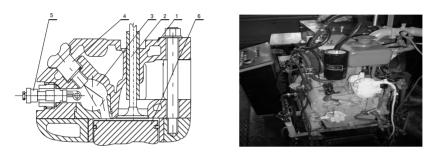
Cross-section and view of a two-cylinder self-ignition engine: 1 - head, 2 - valve, 3 - vortex chamber, 4 - injector, 5 - glow plug, 6 - piston
